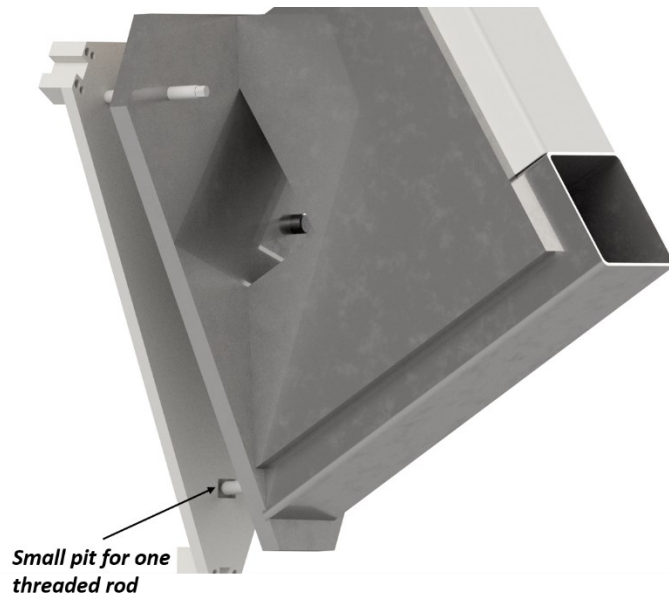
one of the threaded rods allowing tip-tilting of the handling movable part is inserted into a small pit in the movable part, to prevent its rotation around the mirror optical axis.
